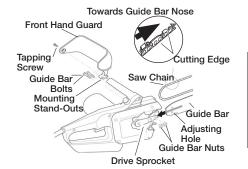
Assembling Guide Bar, Chain, and Hand Guard
